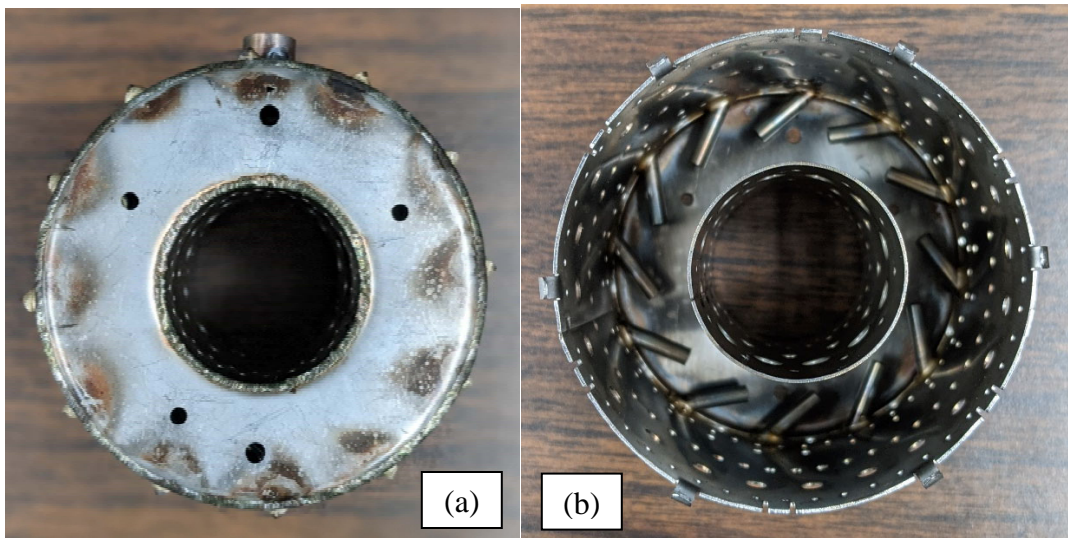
Intake side (a) and exhaust side (b) of combustion chamber
